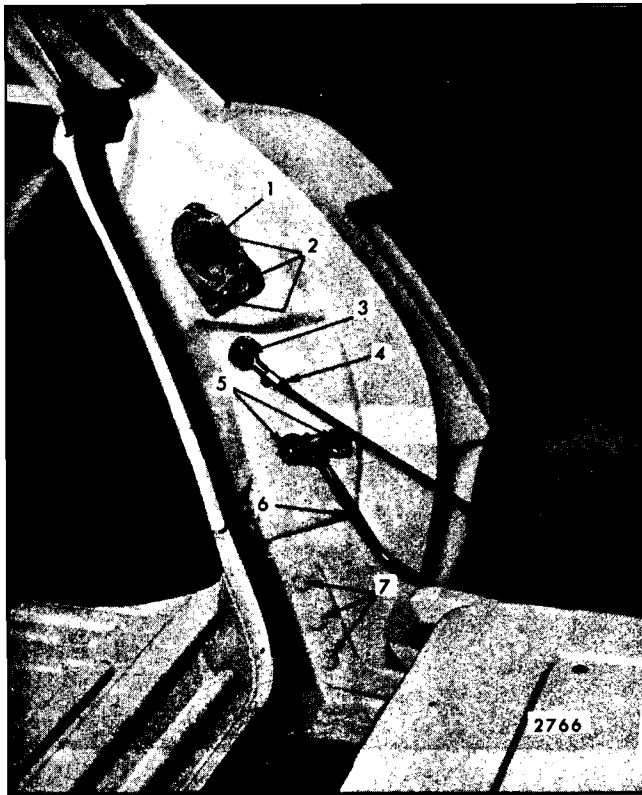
Tail Gate Torque Rod, Hinge and Support Attachments
